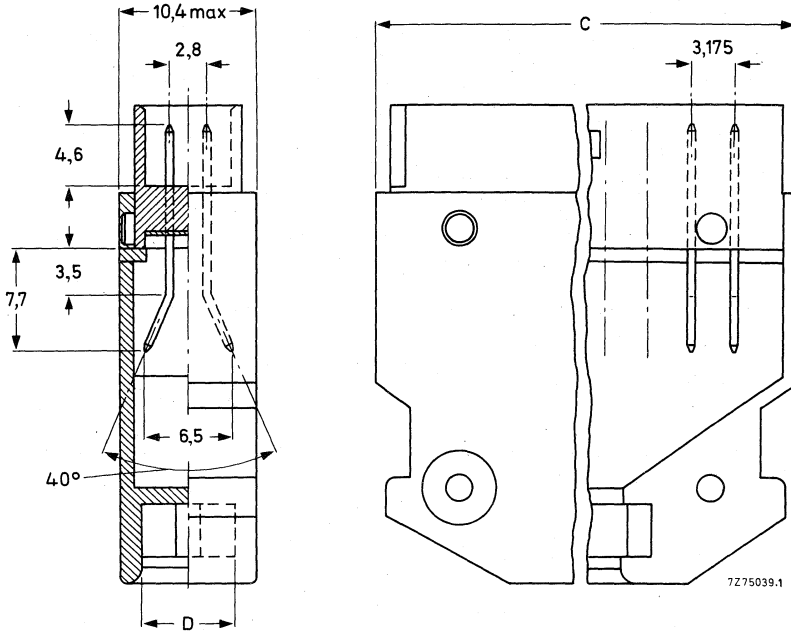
Test cord plug with cable hood. See Table 4 for dimensions C and D.
